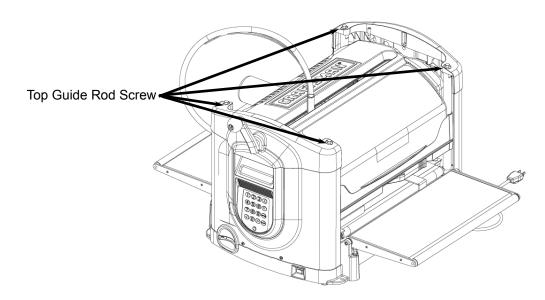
LOCATION OF TOP VERTICAL GUIDE ROD SCREWS
